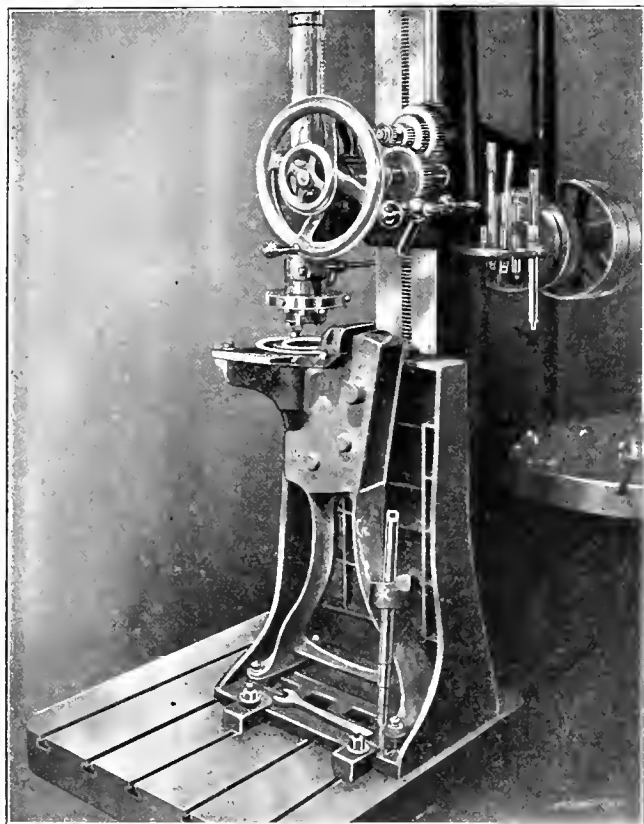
Machining the Holes and Cylindrical Surfaces about the Axis of the Bowl and Spindle
